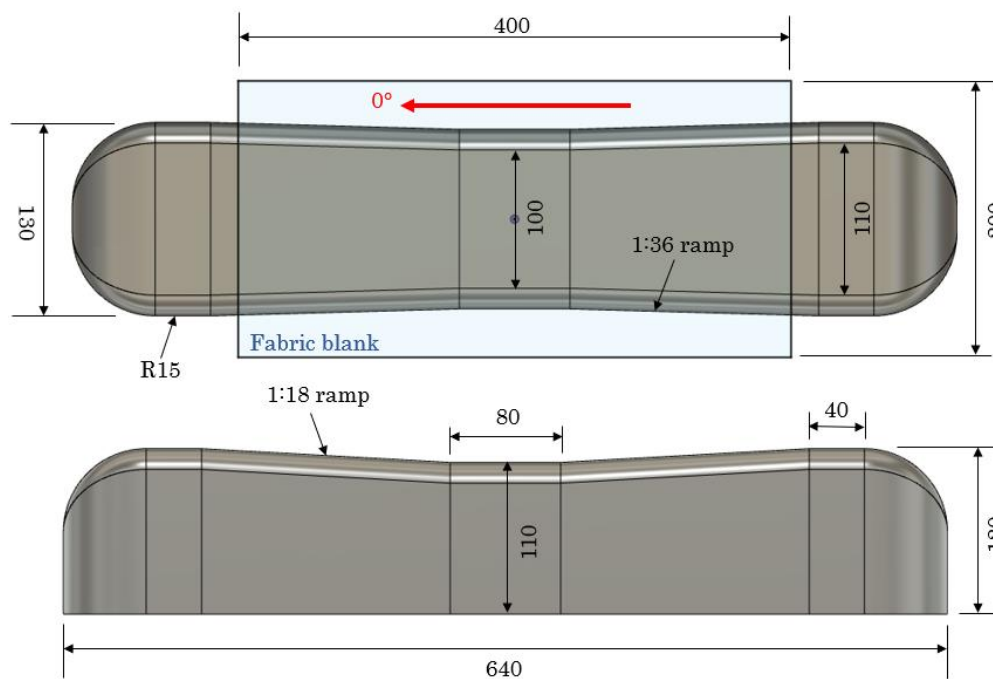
Geometry of male C-spar tool and fabric blank position used for experimental study (dimensions in mm). The principal fibre direction is indicated with a red arrow.
